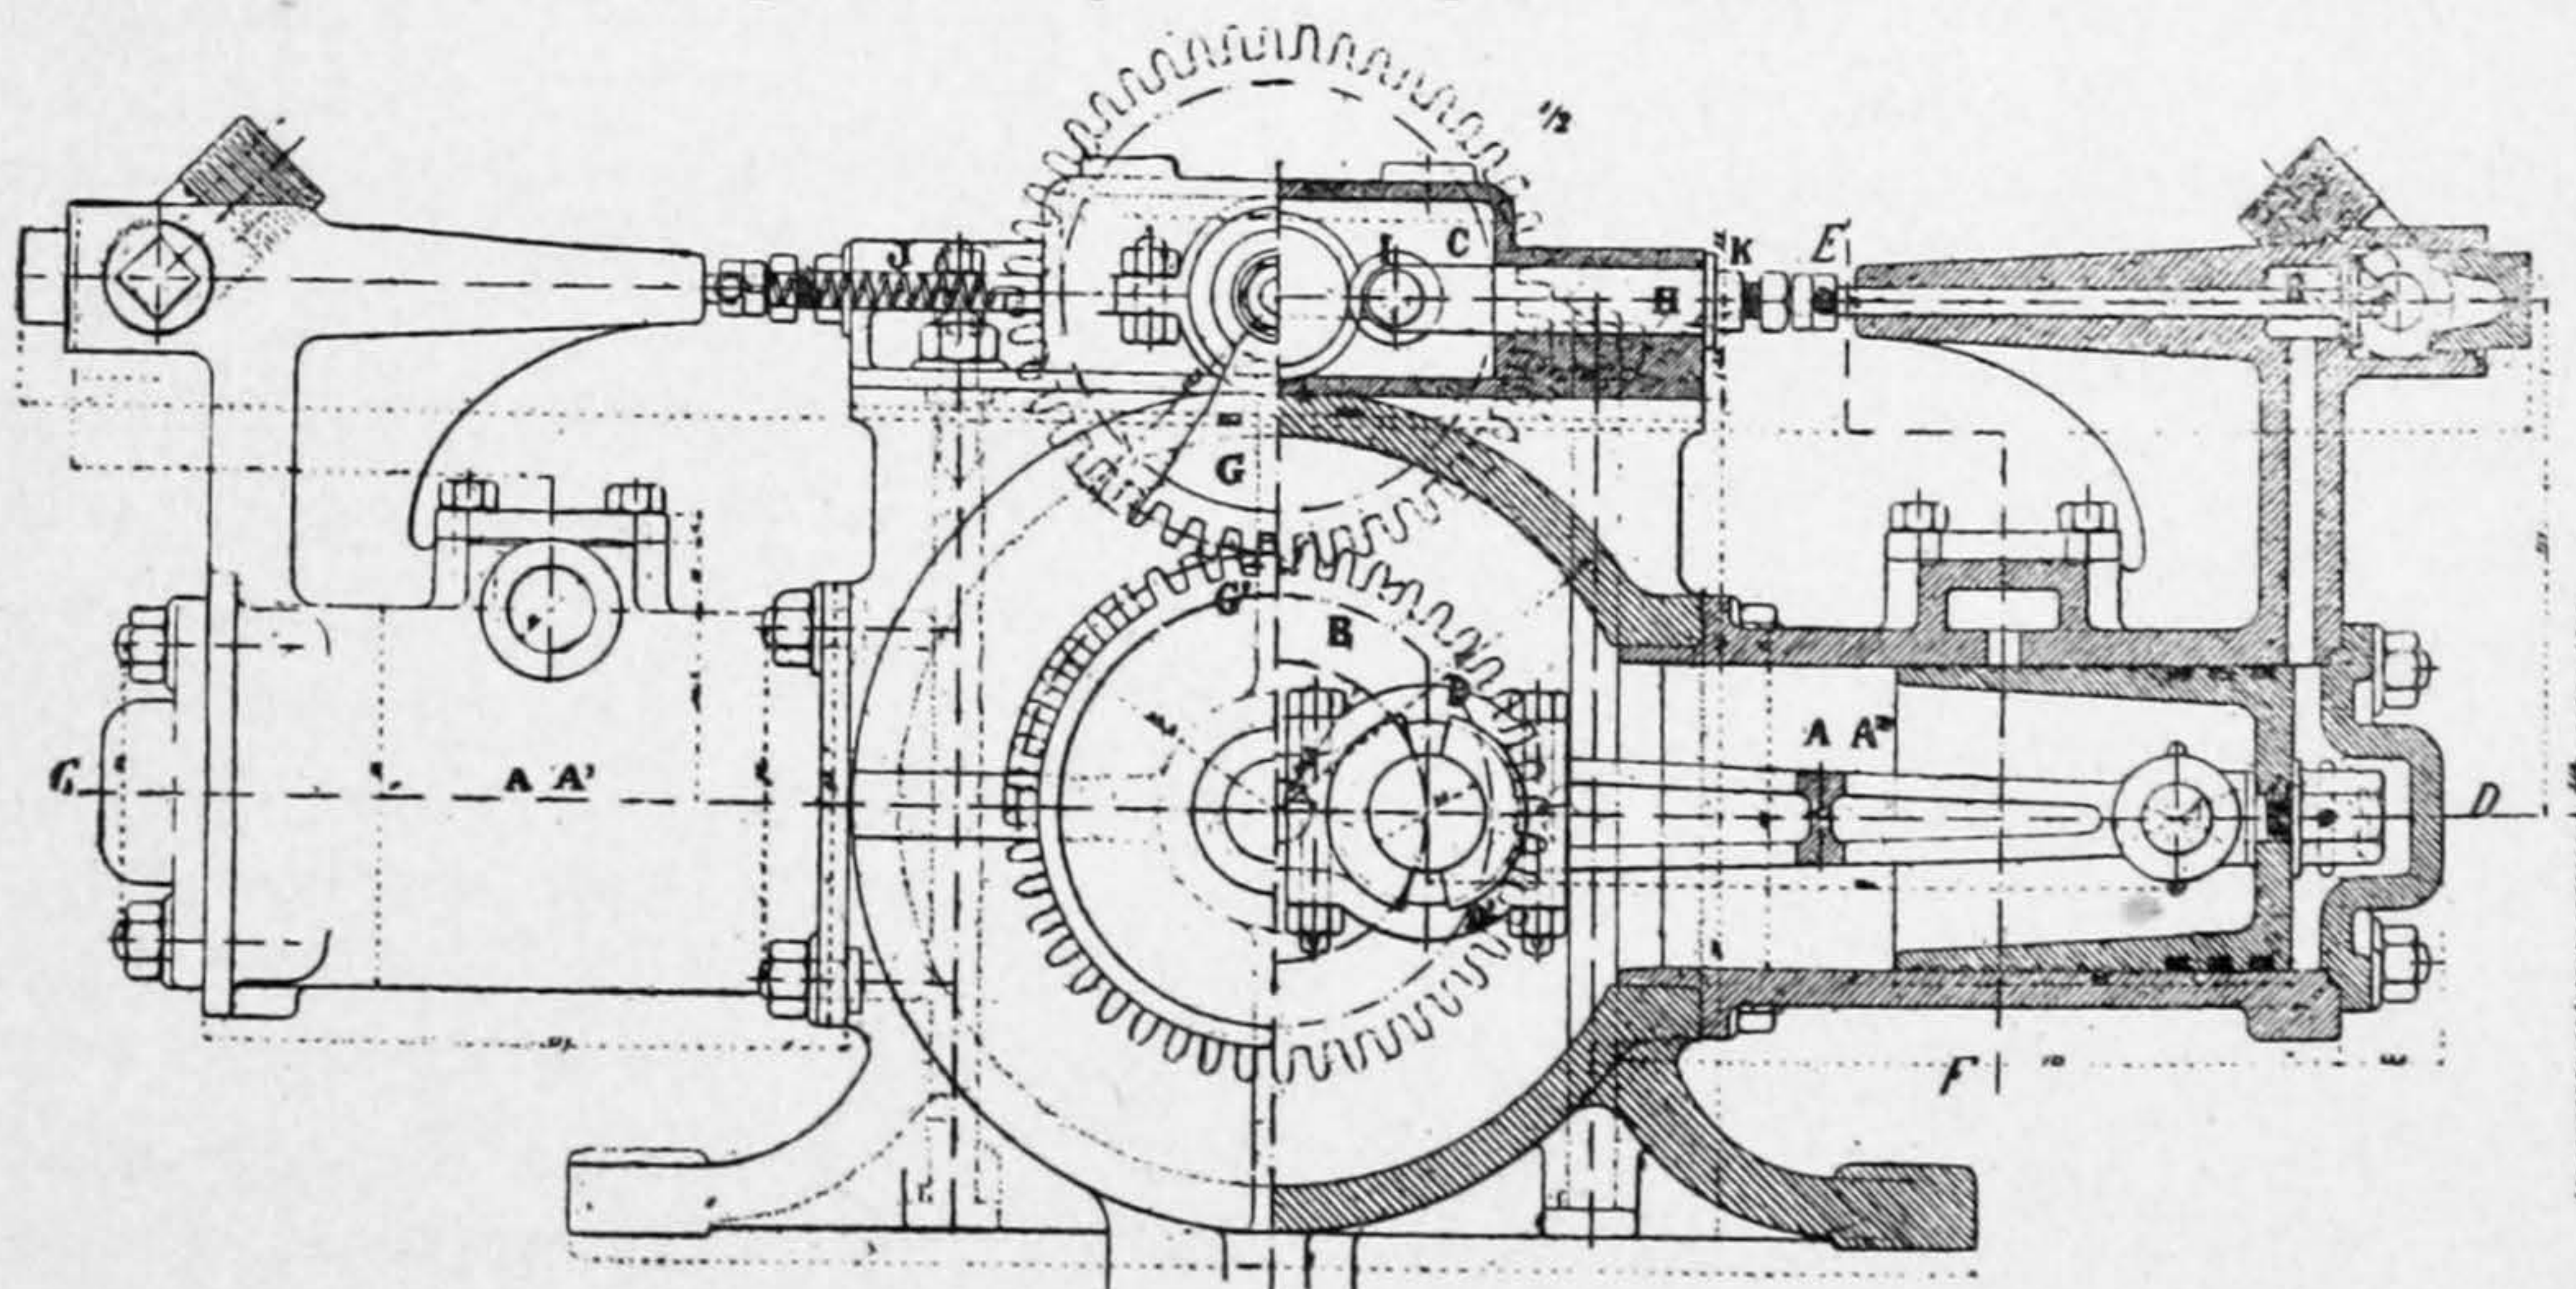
HALF-SECTIONAL ELEVATION OF MOTOR.
